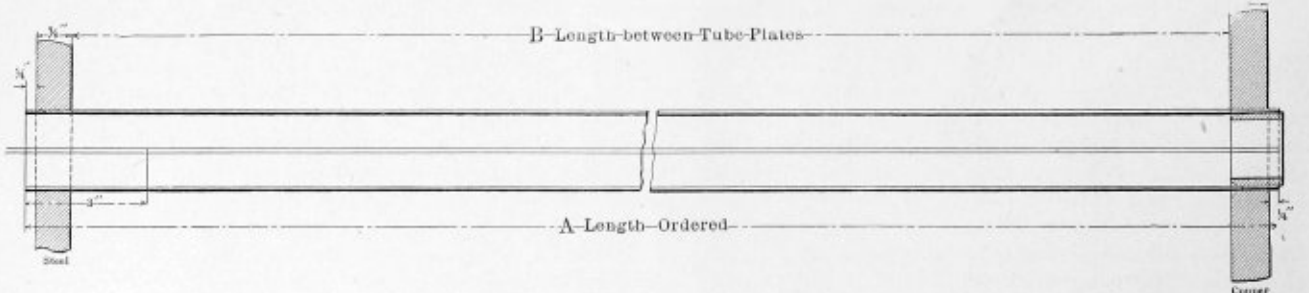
METHOD OF SETTING TUBES USED ON THE LANCASHIRE & YORKSHIRE RAILWAY OF ENGLAND.
